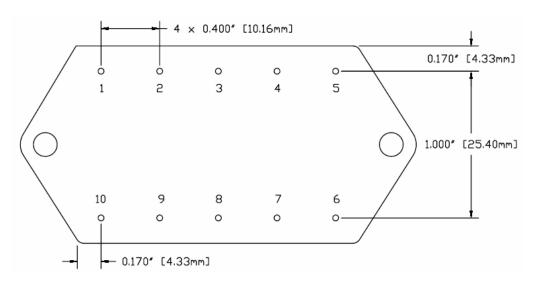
Non-Flanged, Solder Seal Tin Plated Package and Pinout (Dimensional Limits are ±0.005" Unless Otherwise Stated)
